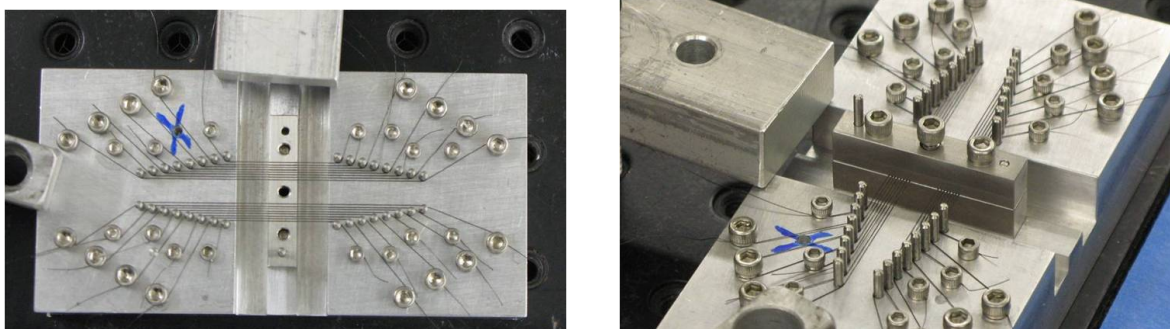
Two views of the jig used for hand-cutting thoria-tungsten wire inserts. Left: Top view after stringing wire over bottom clamp block. Right: Angle view after clamping wire between both clamp blocks. After this, a rotary grinding tool was used to rough-cut the wires, then the clamp block assembly was removed from the main jig to buff the wire ends flush with the sides of the blocks.
